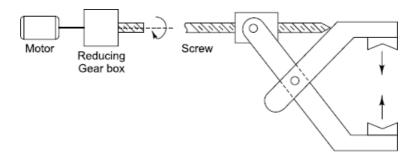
indicates an example of screw-type actuation used in the gripper design. The screw is turned by a motor, usually accompanied by a speed reduction mechanism. Due to the rotation of the screw, the threaded block moves, causing the opening and closing of the fingers depending on the direction of rotation of the screw.
